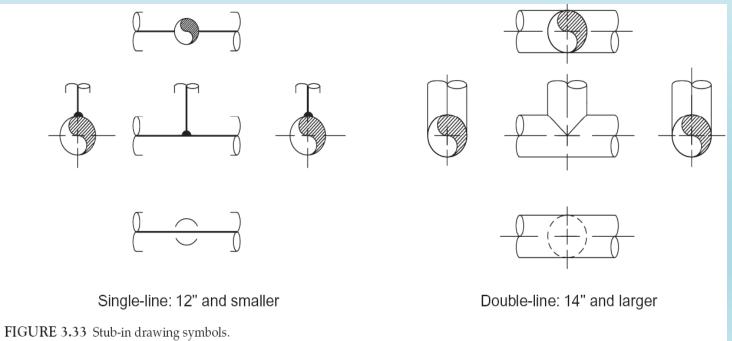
depicts the single-line and double-line drawing symbols for a stub-in connection. Notice only one weld dot is shown on the single-line symbol and it is placed at the intersection of the header and branch pipe lines. Also notice that the weld dot is not a complete circular shape. It is semi-circular and drawn only on the branching side of the connection.
